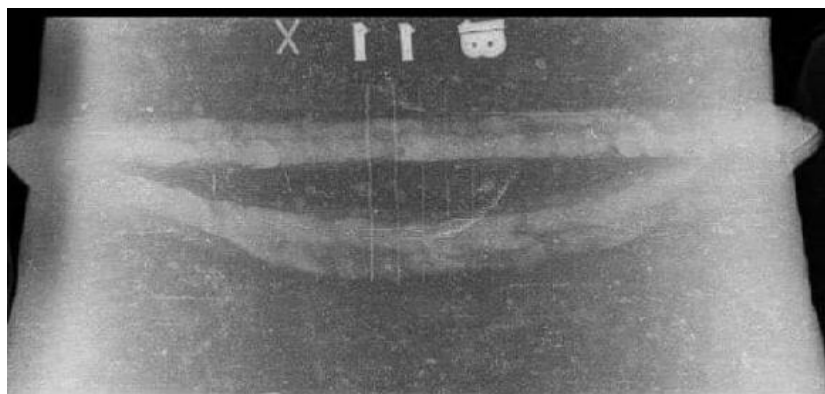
shows the application of on a welded strip when the weld joint is situated at the middle, This test is used to know the strength of the weld metal after it is done on this position. A special type bending machine is used to conduct the guided bend test. The selected material must be has the ability to bend up to a required angle, for example 180 degree without creating any cracks. If this condition occurs, that's mean the weld is passed the bending test.
